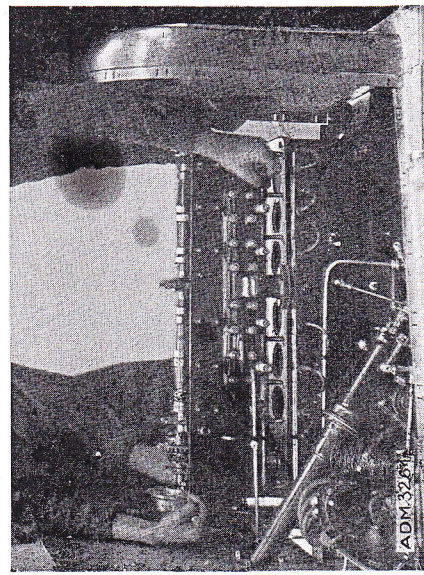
LIFTING THE CYLINDER HEAD (4).
